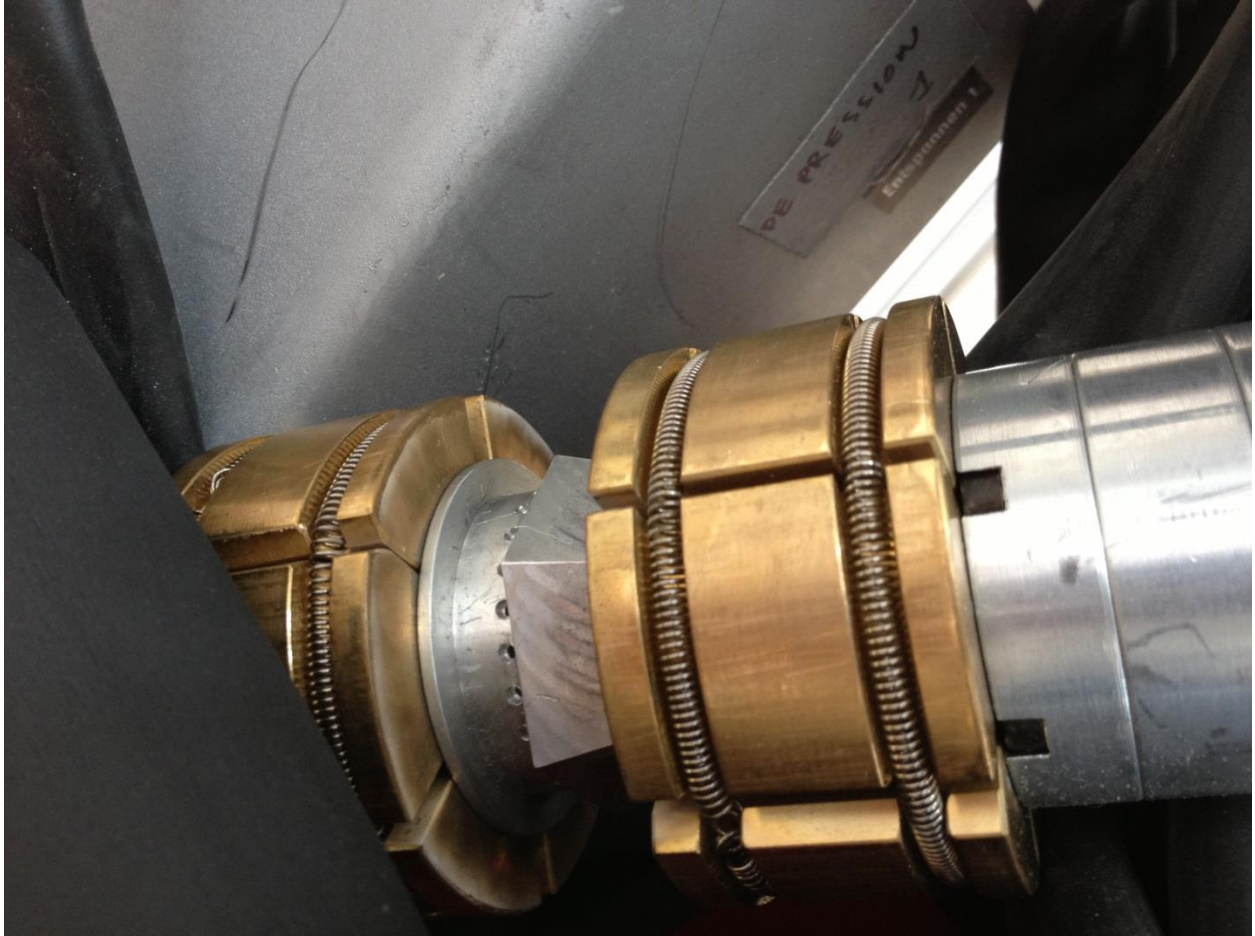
Internal gas manifold / collet assembly. This device (Westphal) both supports the tubing and provides Ar-He to the inside of the pipe during welding.
